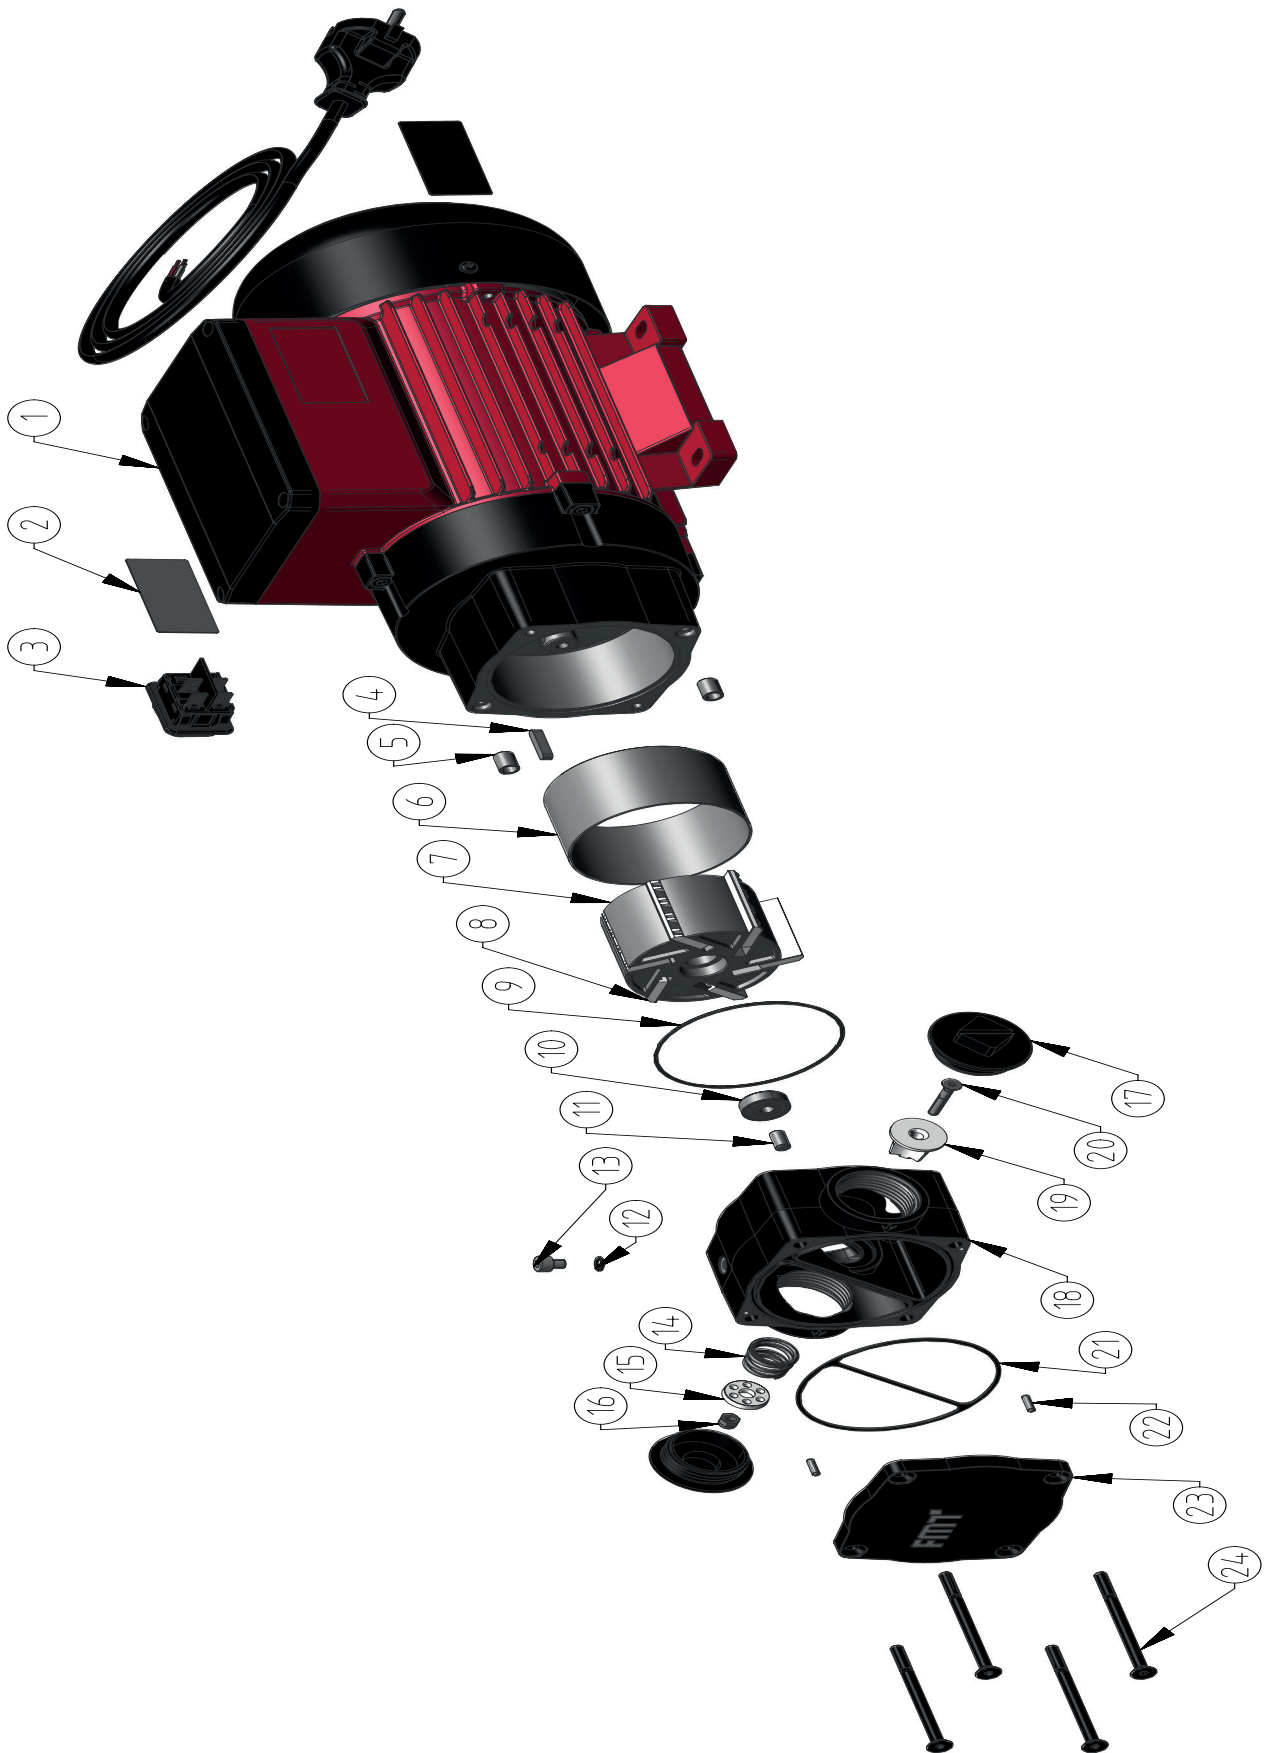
1: Exploded view of the diesel pump 100 l/min
